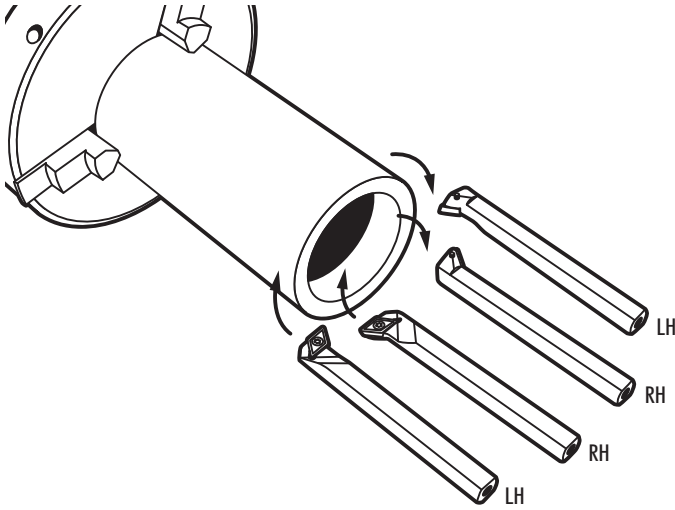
55° boring bars used as examples. The left-hand tools are used as turning tools, while the right-hand tools are used as boring tools.
